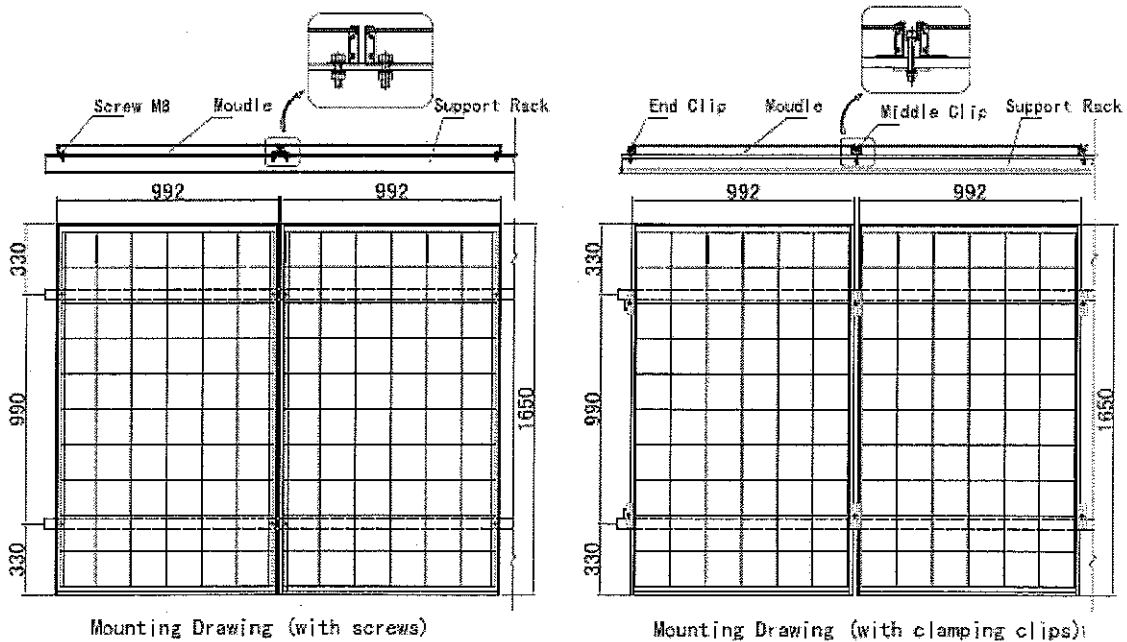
Mounting Drawing for 6*9-156x156mm 54cell SPV Module (with clamping clips and screws)
